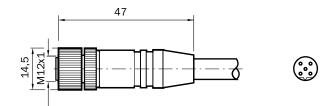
BUS IN, cable socket with PROFIBUS cable, 5 m, B-code
